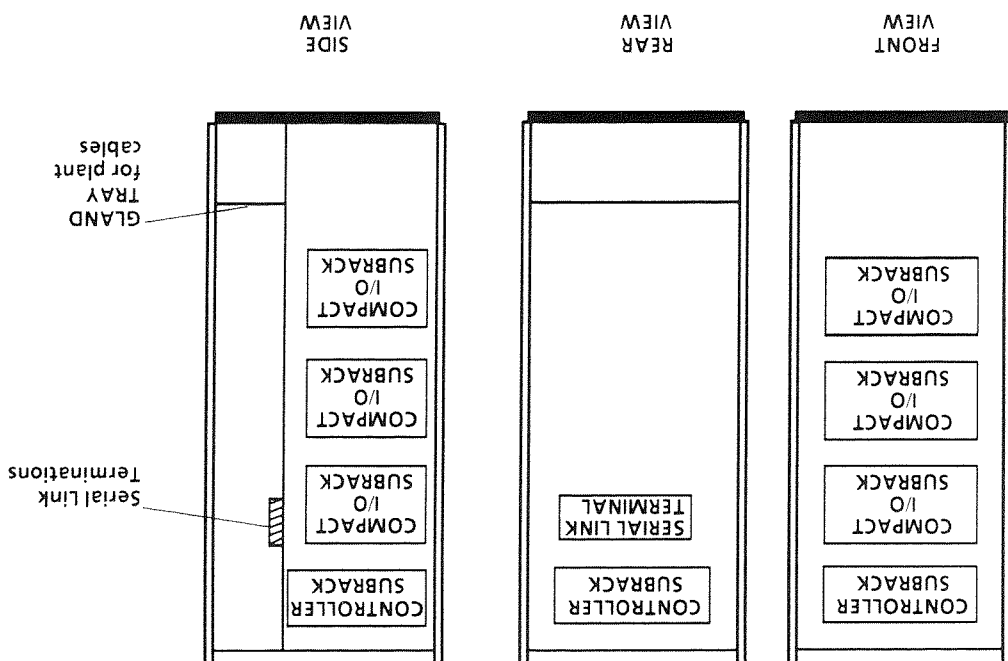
Typical GEM 80 Single Cubicle Layout
